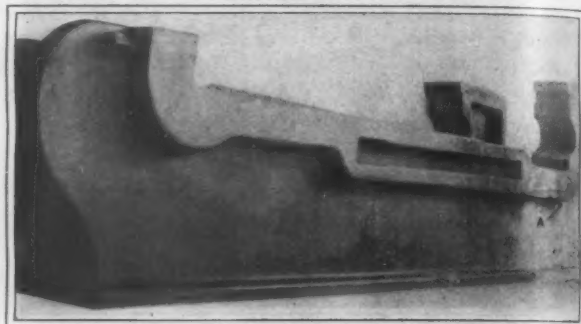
A Cracked Bulldozer Frame Repaired by Welding.
